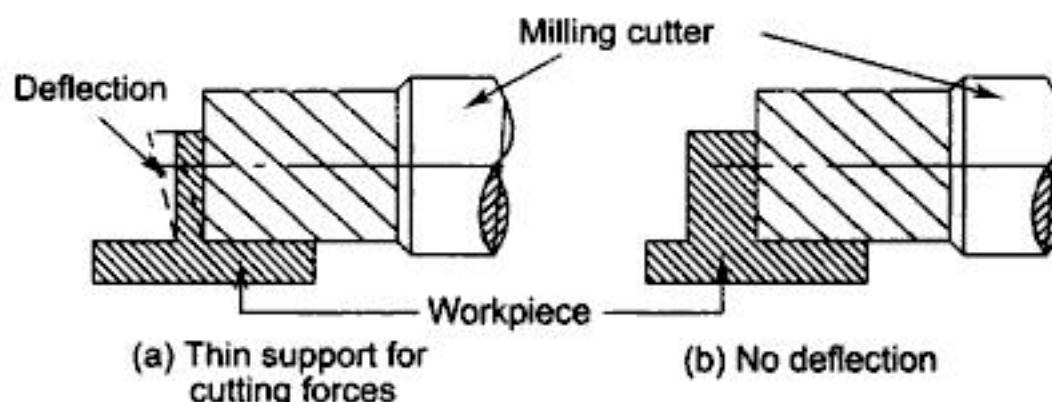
Parts to be machined should be rigid enough to withstand the cutting forces
